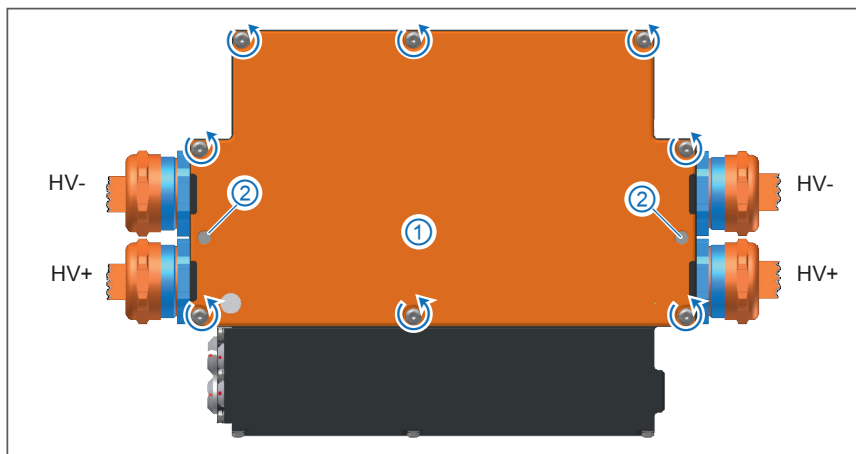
HV BM 1.2+S, HV power cables mounted, lid mounted on the housing
